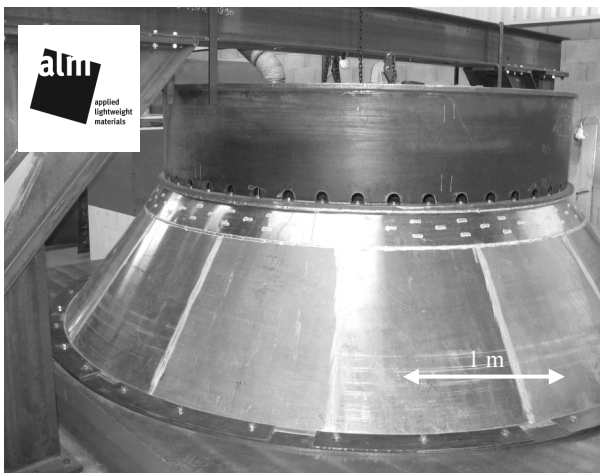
Prototype of conical fitting for the Ariane rocket. Courtesy of Alm Saarbrücken, Germany.
